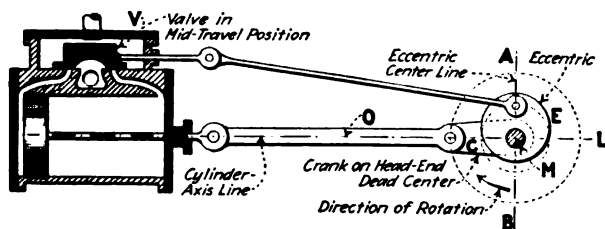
Valve in mid-travel position with crank on head-end dead center. (Advance angle = 0.)
